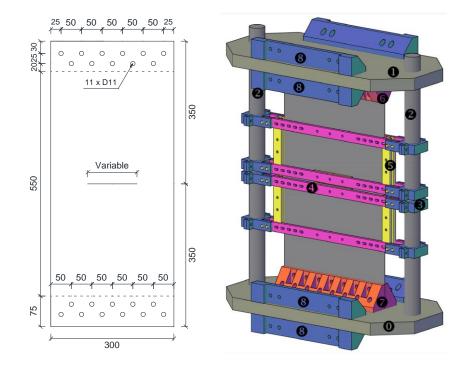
Dimensions of the samples (mm) and 3D view of the fixture.
